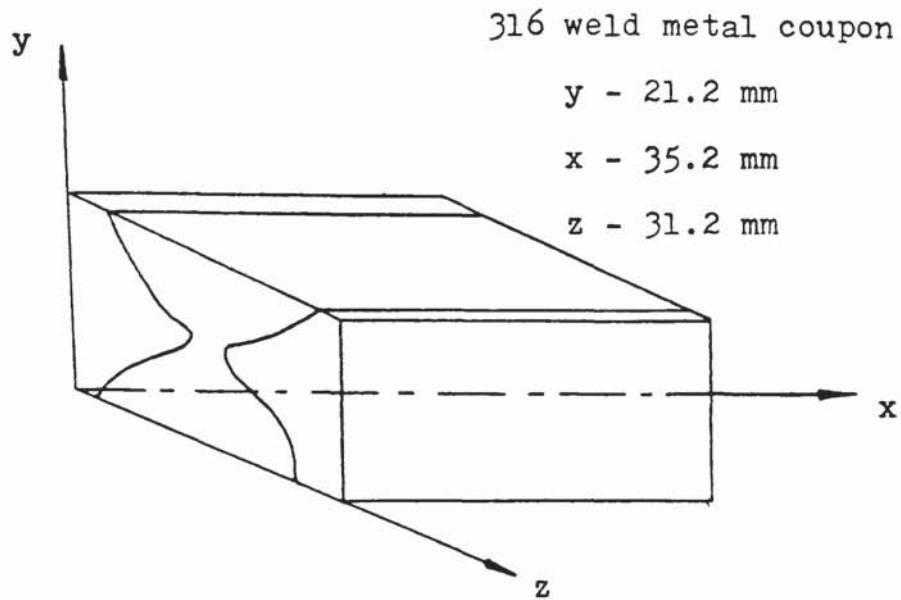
Austenitic weld and plate metal coupons
